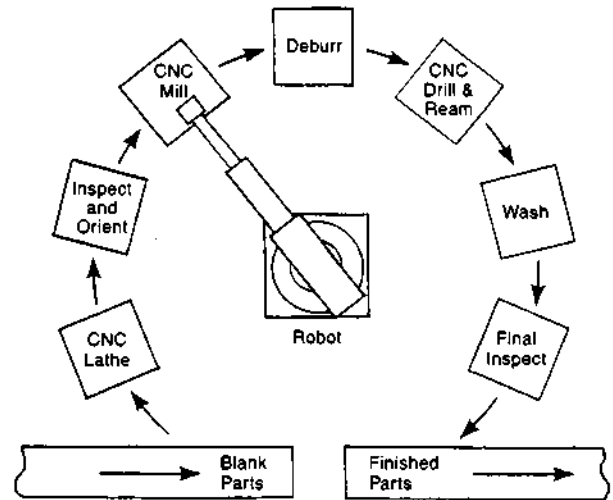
G8 A manufacturing cell with a circular layout so that a single robot can move workpieces between the conveyors and the production machines.
